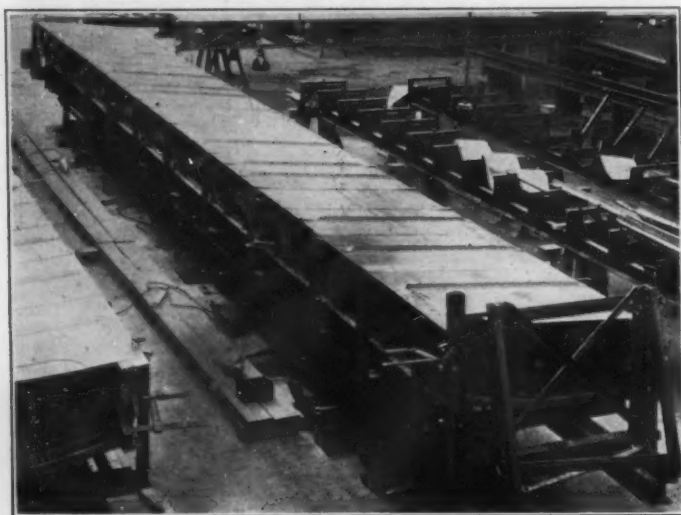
INSTALLATION OF THE LOWER SKIN OF A WING
